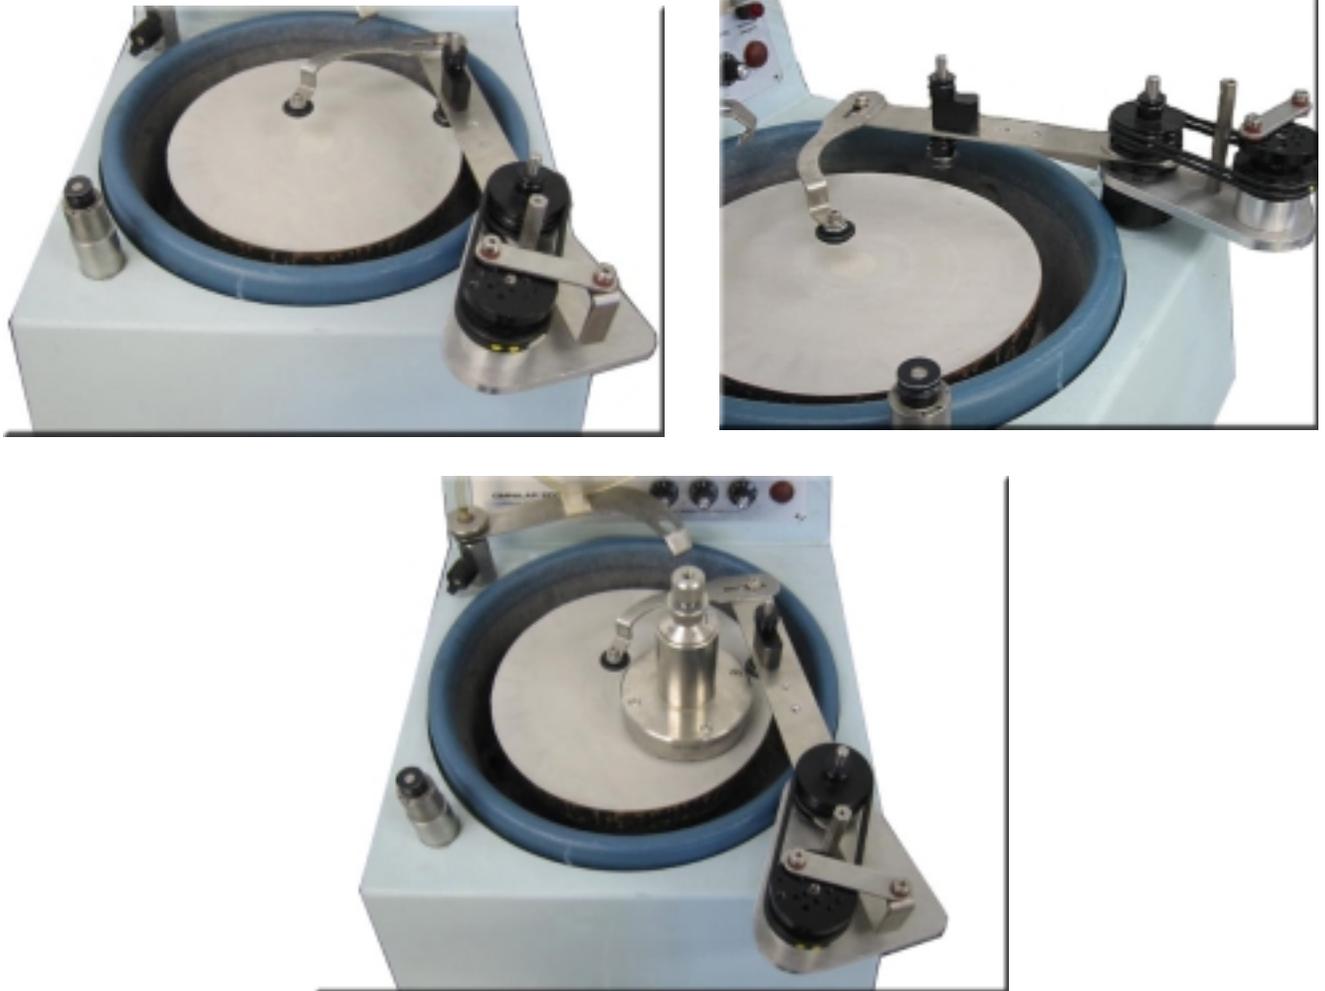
The Model 92022 R Yoke Sweep Mechanism shown mounted to the Model 920. The lapping fixture is placed between the idler wheel (mounted to the arm extension) and the drive wheel running from the cam assembly. The entire assembly is used to rotate the lapping fixture and 'sweep' the fixture laterally to increase the polishing uniformity. For abrasive papers and polishing cloths the lifetime is extended as the wear rate is normalized across the radius of the plate. The bottom image shows the Model 155 Lapping Fixture with the 92022.
